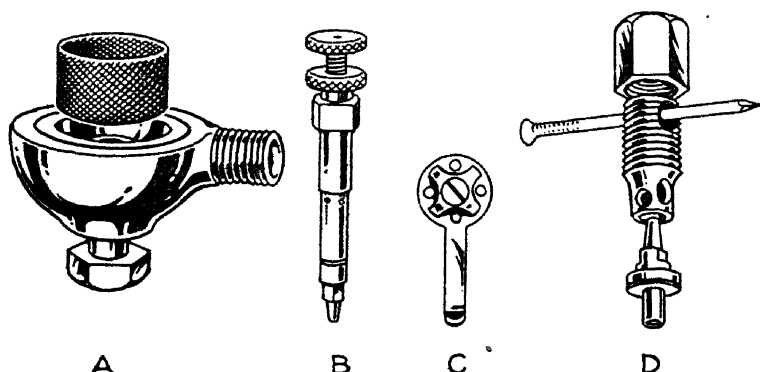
A. Component Parts of R.A.G. Carburettor. A, Petrol Filter. B, Slow-running Jet. C, Idling speed regulator. D, Showing Method of removing Jets.
